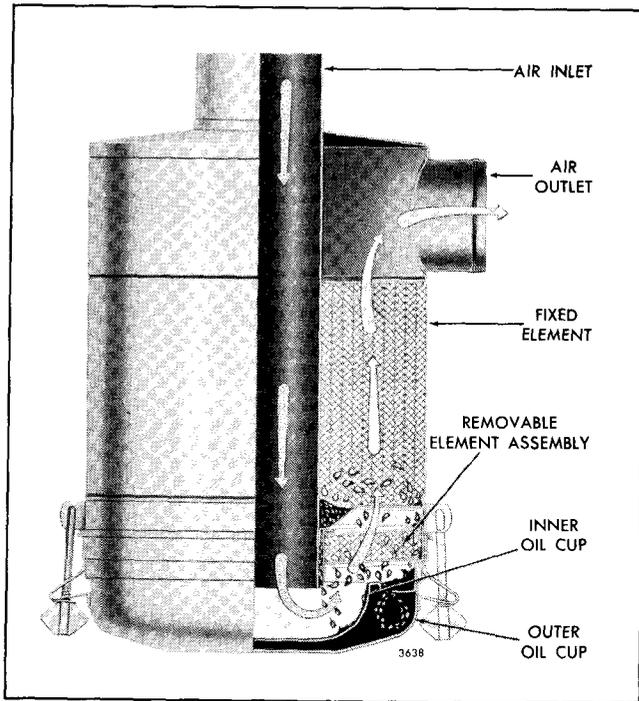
Heavy Duty Oil Bath Air Cleaner Assembly
